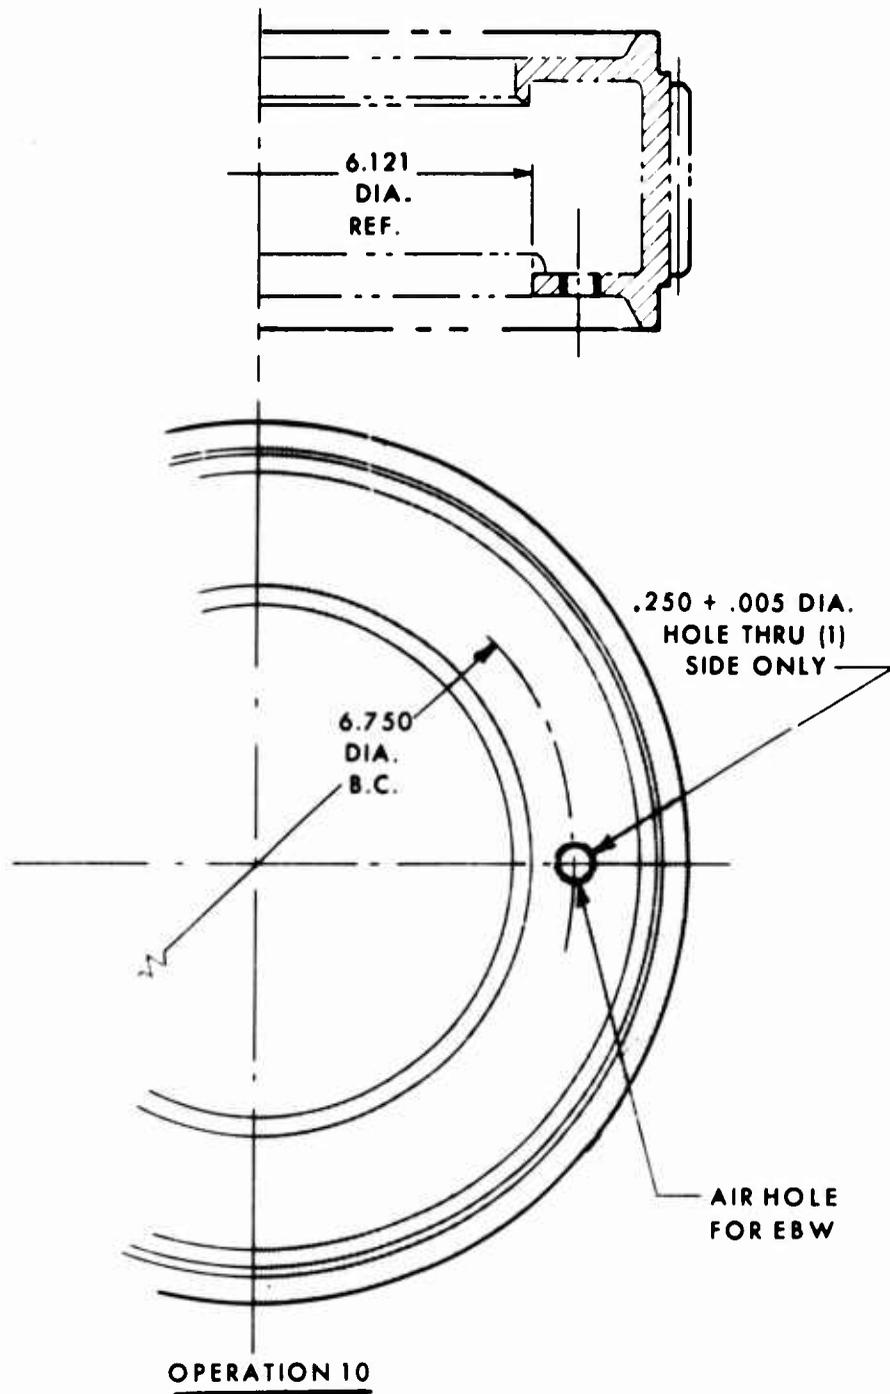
RG351-11181-054 Machine Operation Drawing.
